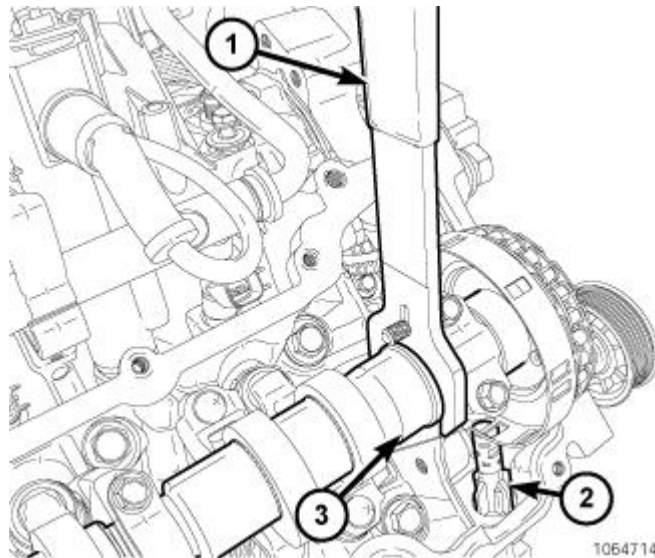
Removing/Installing Cam Sensor And Camshaft Sprocket Bolt Using Spanner Wrench
